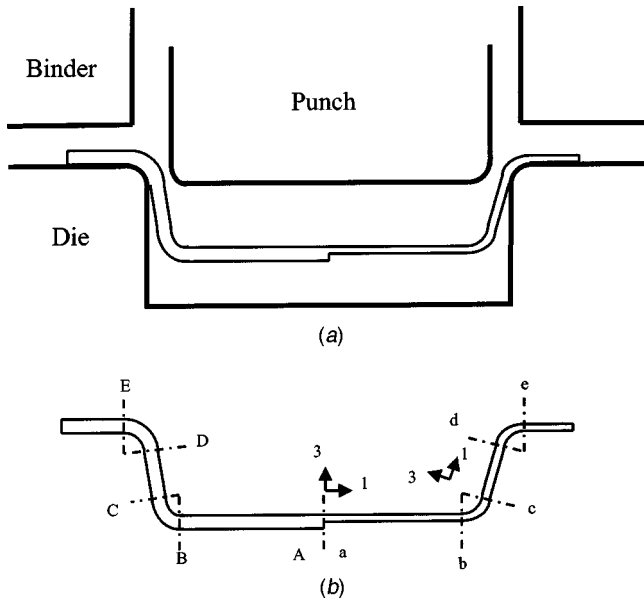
2D cross-sectional view of (a) TWB and tooling and (b) TWB and key locations identified
